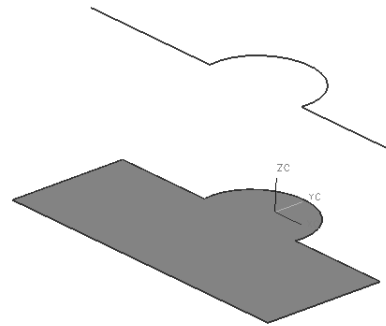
The resulting trimmed sheet after selecting the Discard radio button
